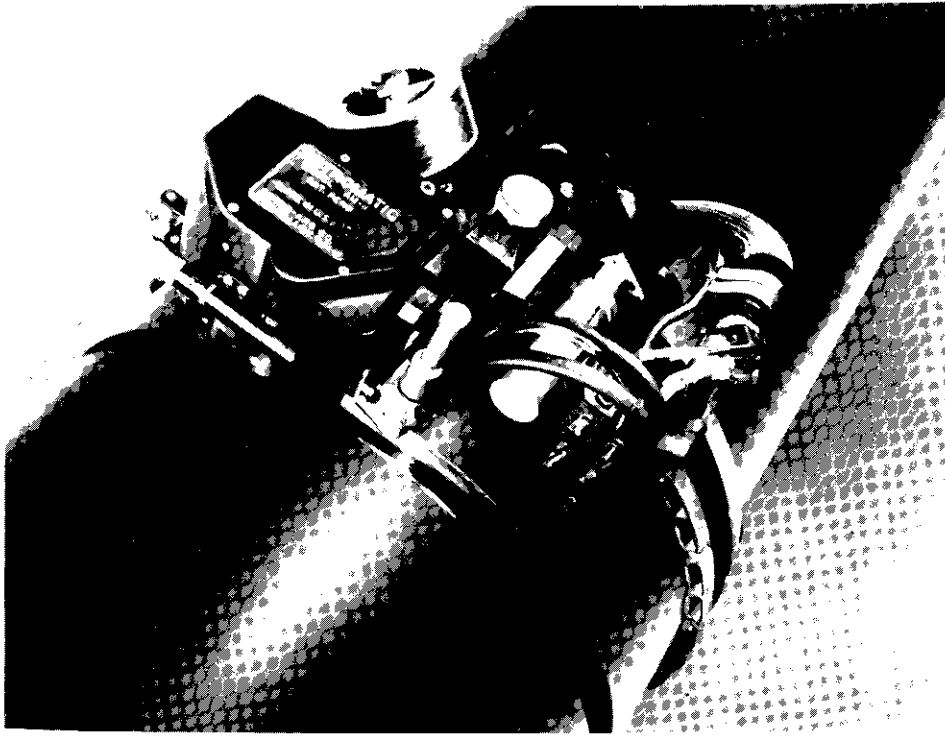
TYPICAL COMMERCIAL MINIATURE GTA TUBE WELDING CRAWLER UNIT WITH AVC, TORCH OSCILLATION, AND WIRE FEEDER
